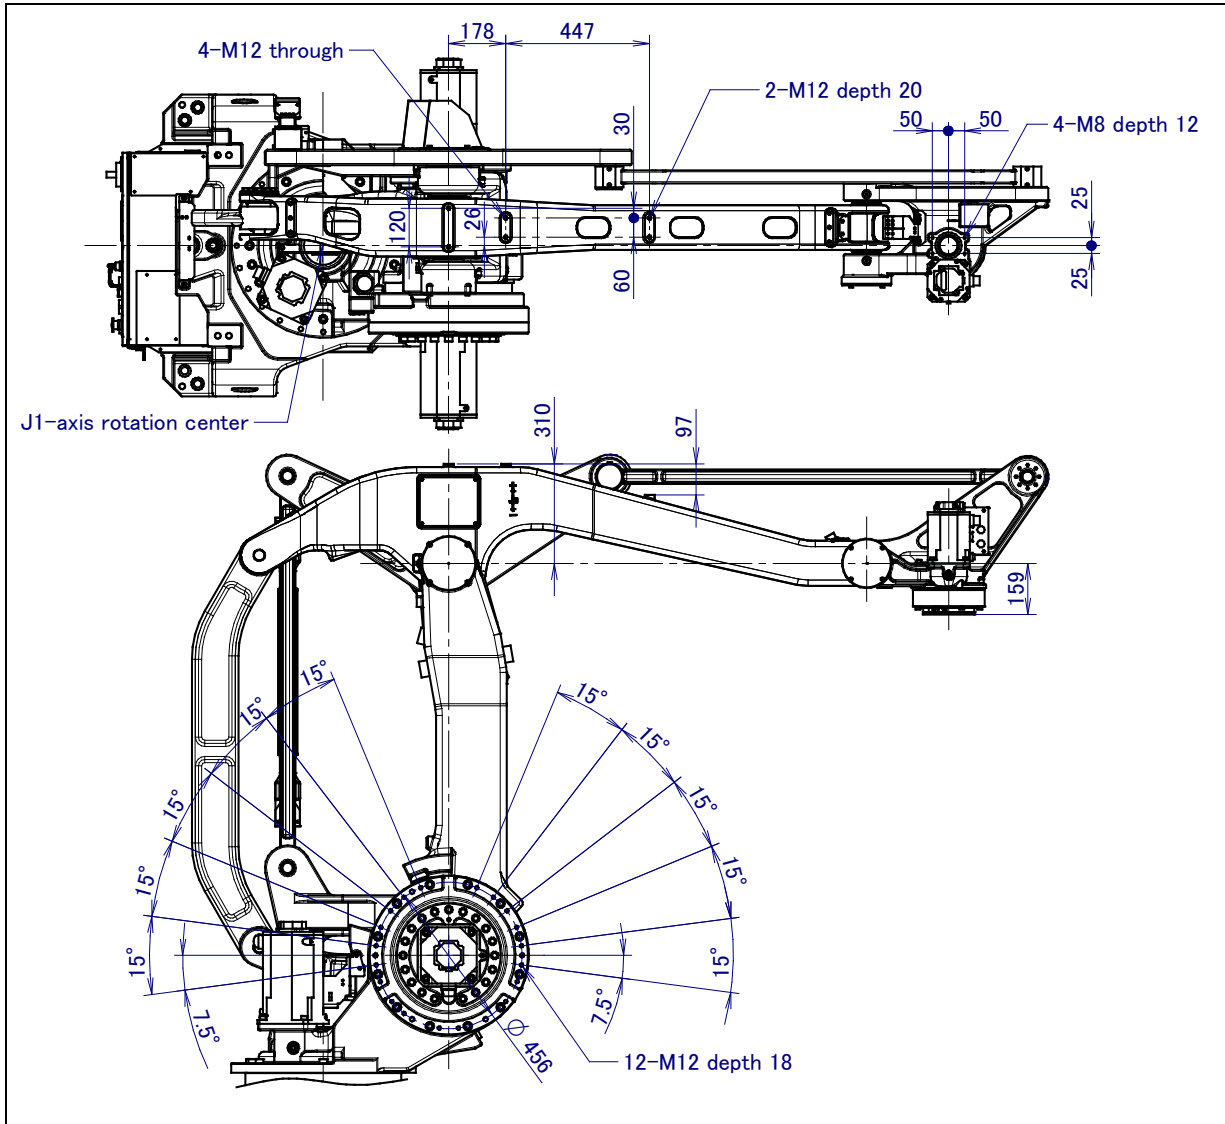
(b) Equipment mounting faces (M-410i/C/185/315)
